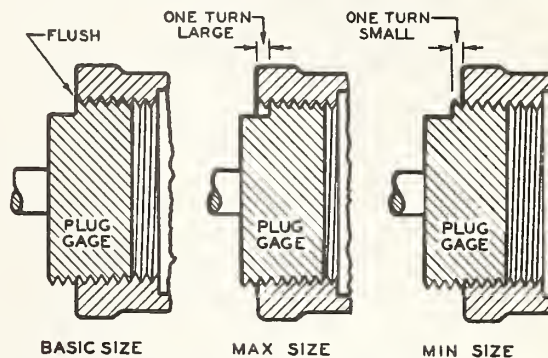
Gaging of internal American National taper pipe threads with working gage.
